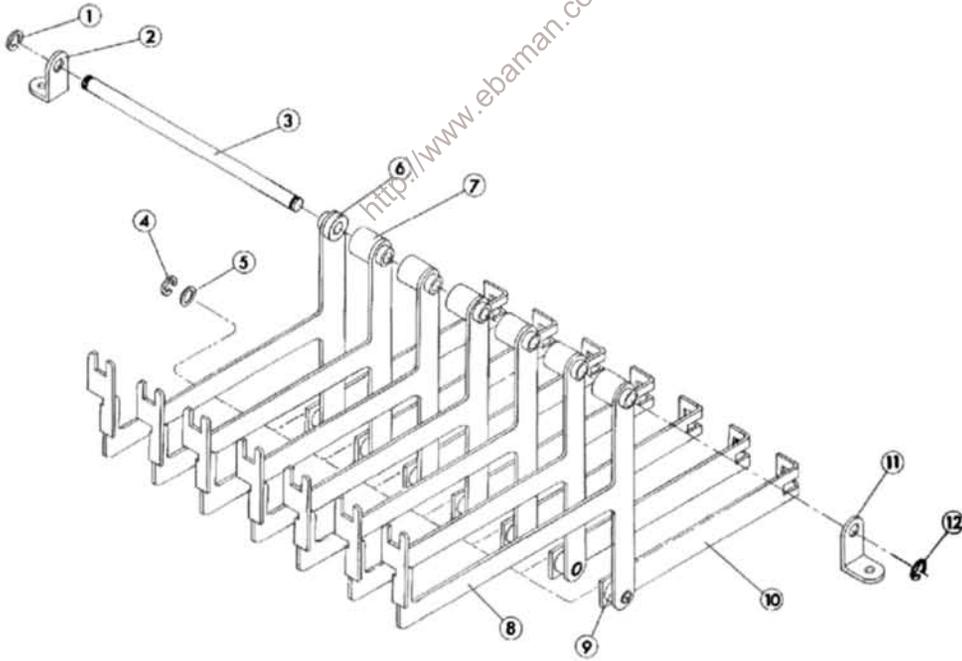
Exploded View of Oscillator Lever Ass'y
